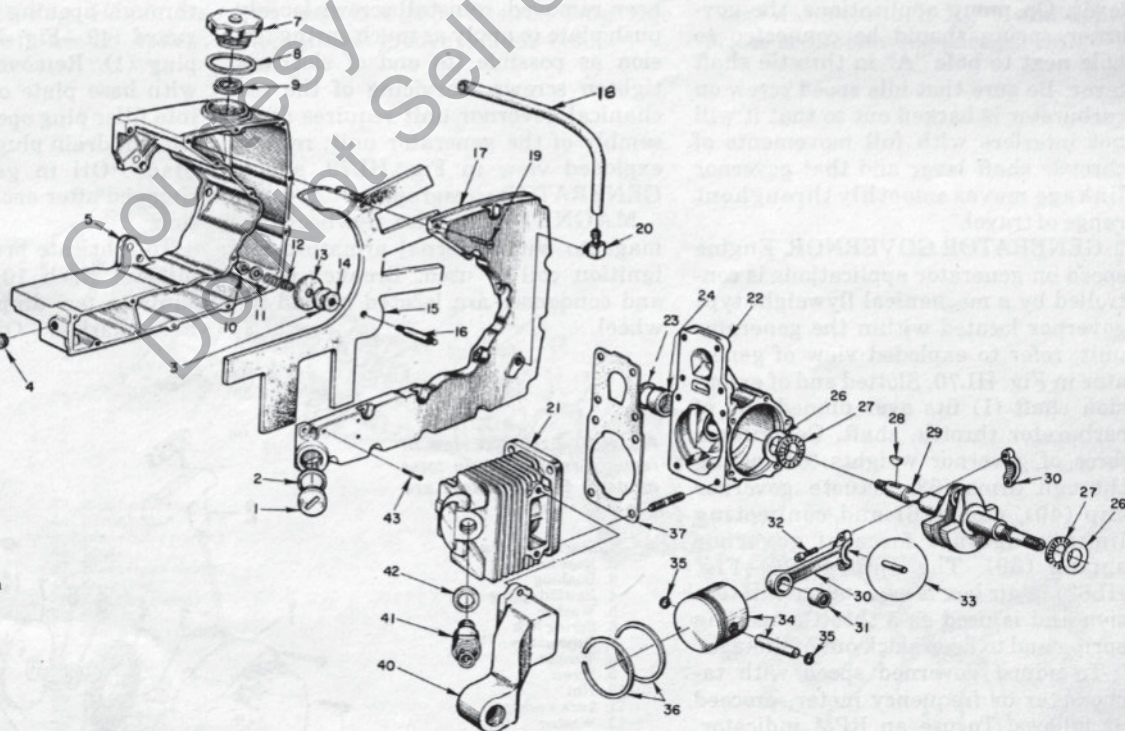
Exploded view of early XL-12 engine assembly. Later models are similar. Crankcase side cover, needle roller main bearing and the crankshaft seal are a part of the circular saw, pump, generator or brushcutter assembly as shown in Fig. HL68, HL69, HL70, or HL71. Saw, pump, generator or brushcutter must be disassembled to gain access to crankshaft; refer to appropriate unit paragraph.
